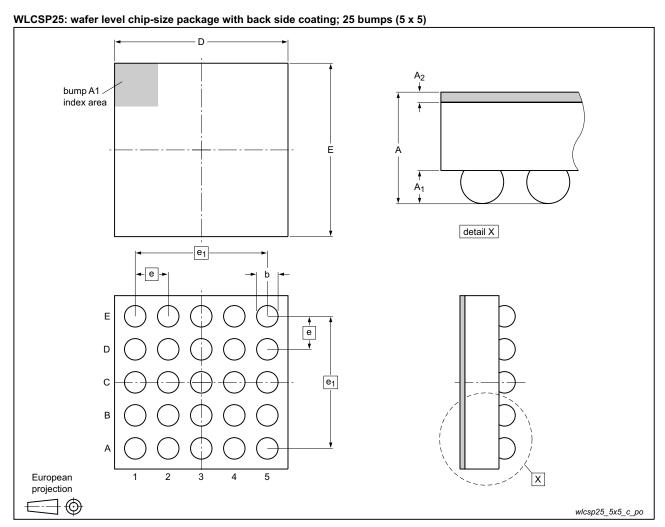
Package outline IP4855CX25/C (WLCSP25 with back side coating)
